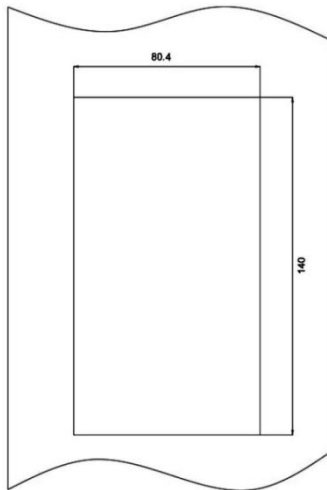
Dimensions of opening holes on the operation panel support (keypad tray)
